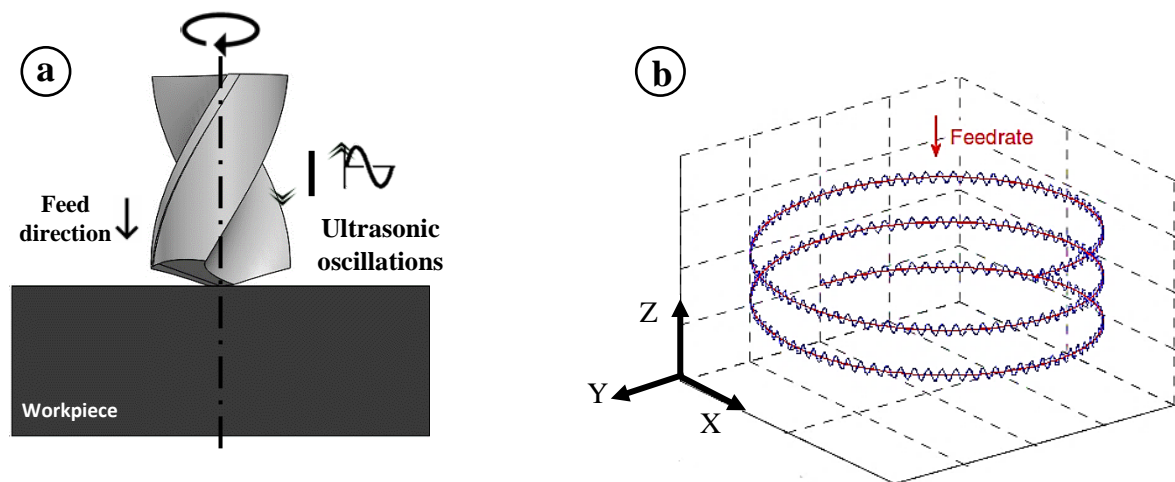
(a) Schematic drawing of ultrasonic-assisted drilling operation (b) the trajectory of any point on the cutting edges of twist drill during UAD.
